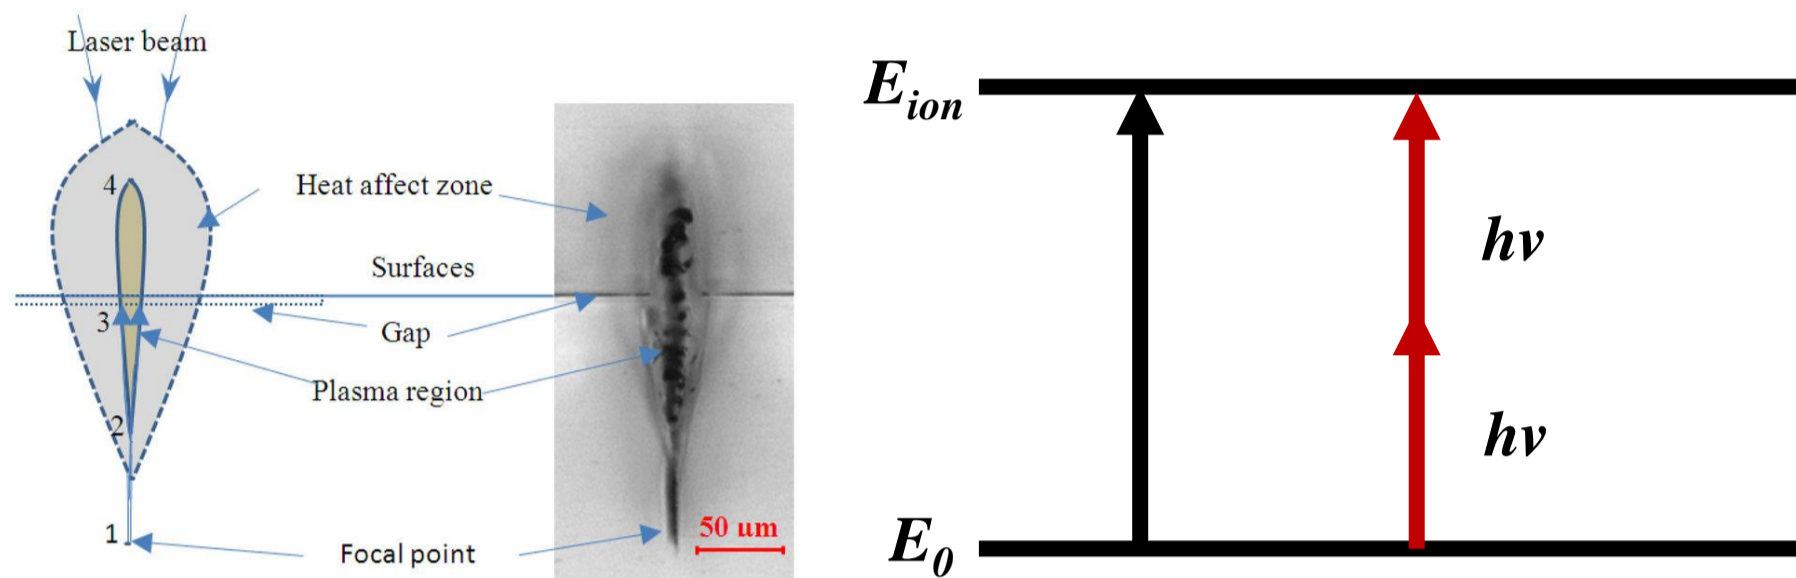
Side view on laser welding samples<sup>[1]</sup> and schematic diagram of multiphoton ionization
